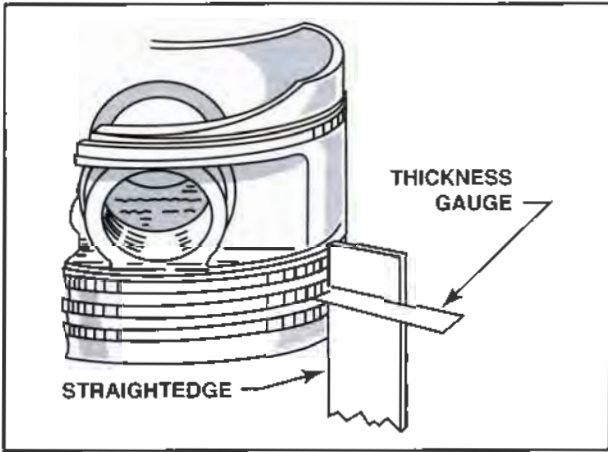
To check side clearance, use a straightedge to hold the piston rings squarely in their grooves and insert a thickness gauge between each ring and ring land.
